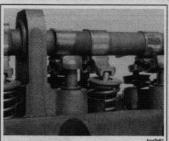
Another example of the rocker arm type OHC head. This model uses a follower under the camshaft
